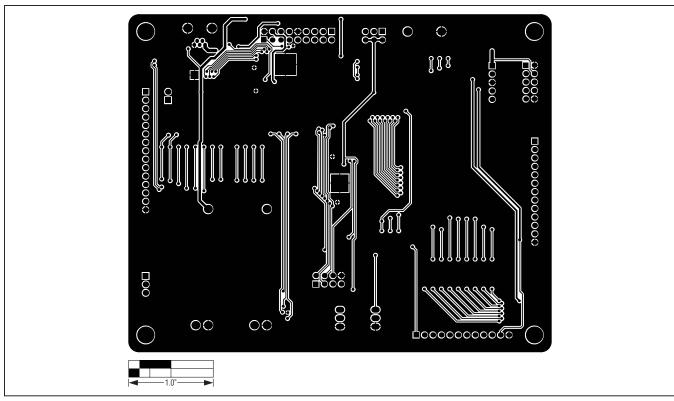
MAX16065EV Kit PCB Layout—Solder Side
